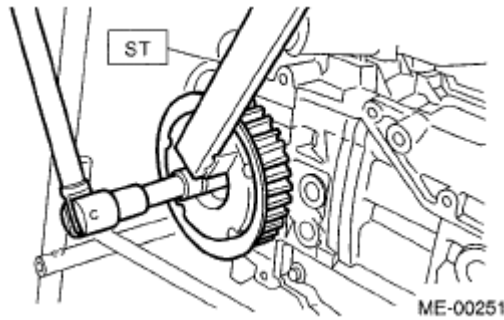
Installing Cam Sprocket No 1 Using Cam Sprocket Wrench ST499207400
